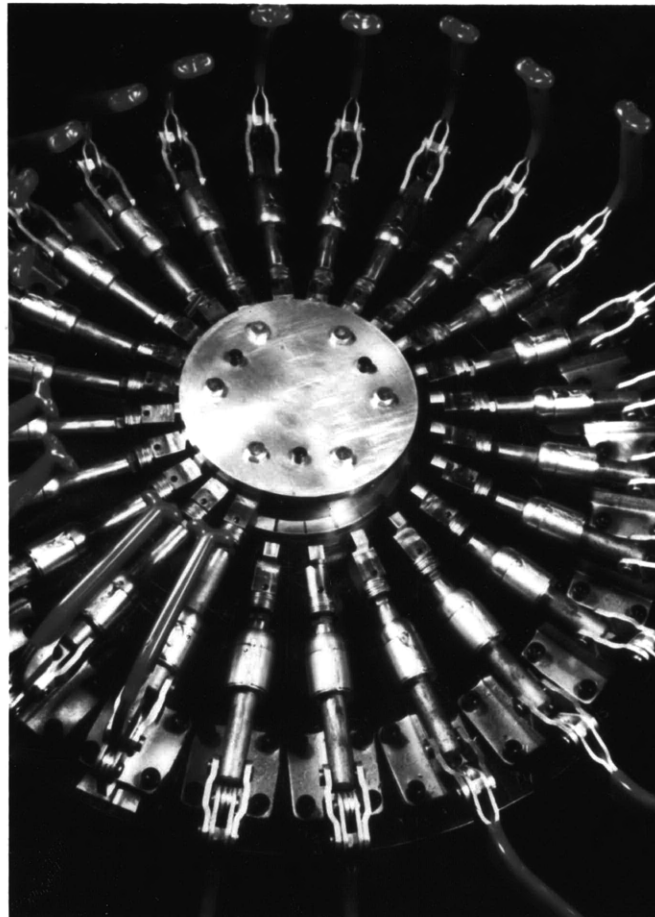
Winding jig showing the mandrel and 24 clamps mounted to the base table
